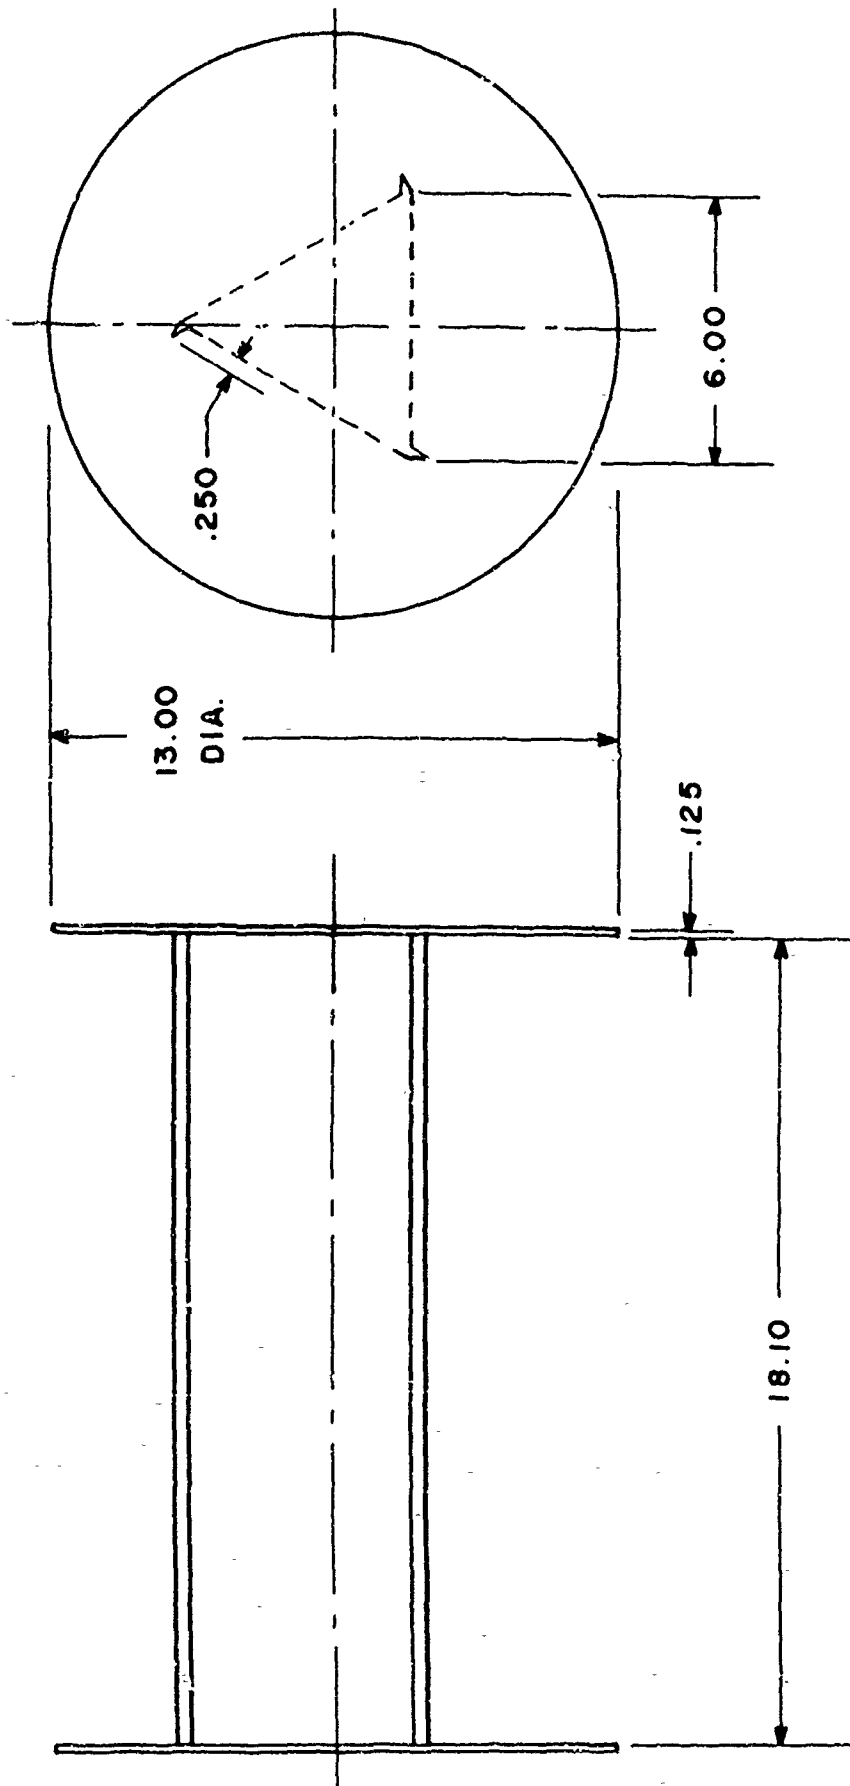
TRIANGULAR MAGNUS ROTOR 1. DIMENSIONS IN INCHES
